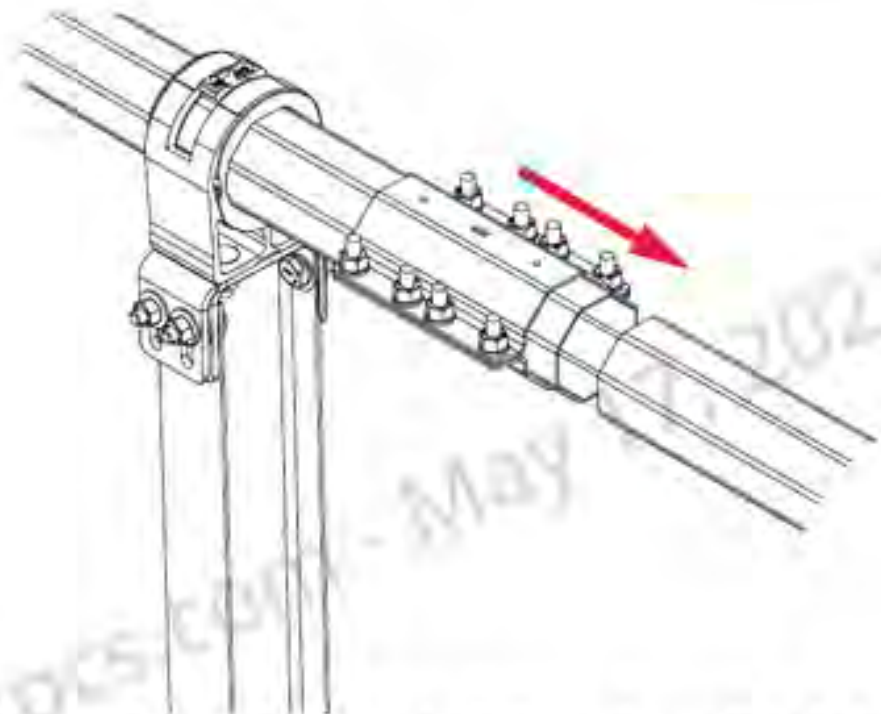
2-Piece Coupler Between Torque Tube Ends
